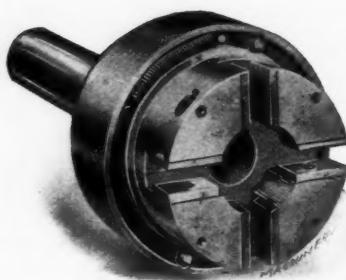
Arrangement of Chaser Guides in Rickert-Shafer Threading Die
